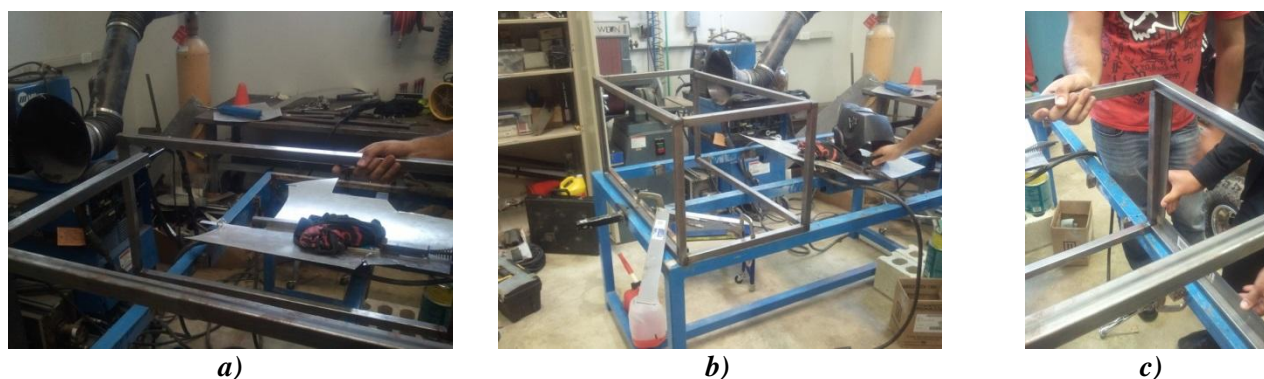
Frame Construction Process. a) Side position of the frame for welding, b) Complete frame assembly, c) Measuring the frame
